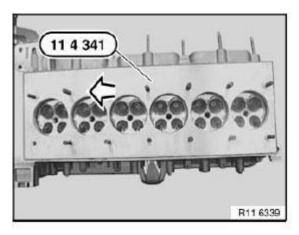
Removing Cylinder Head Courtesy of BMW OF NORTH AMERICA, INC.
